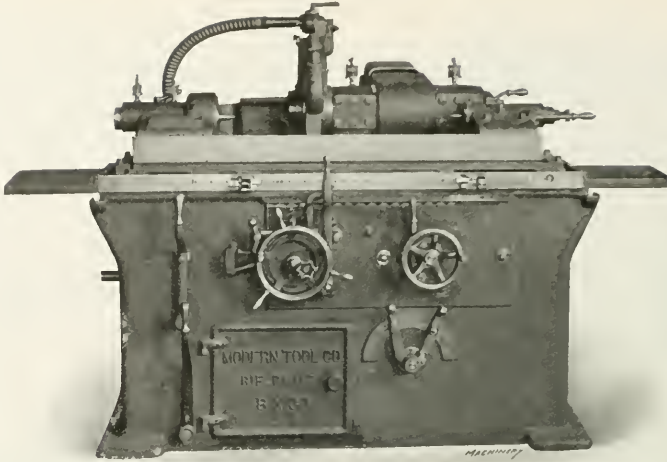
Front View of Modern 8- by 30-inch Self-contained Grinder, with Heavy Type of Drive
